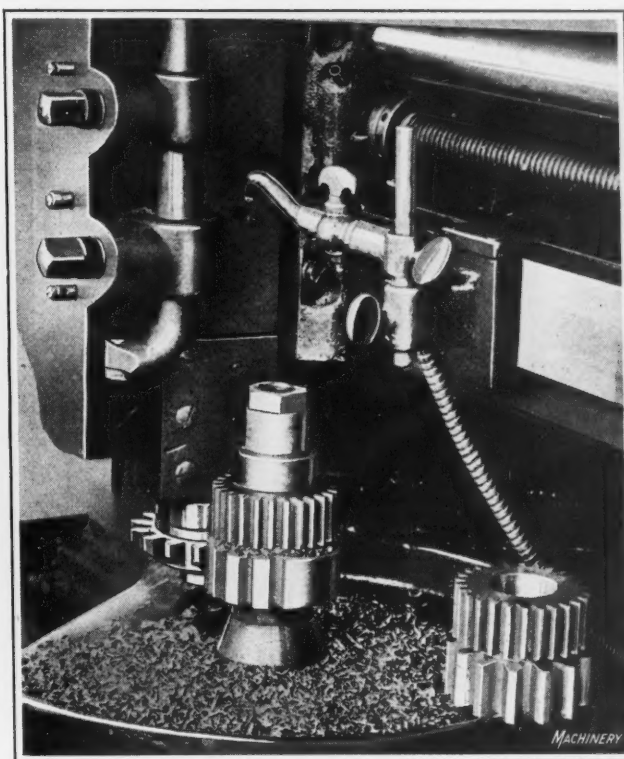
A One-piece Double Gear cut by using the Pull Stroke for the Lower Section and the Push Stroke for the Upper Section
